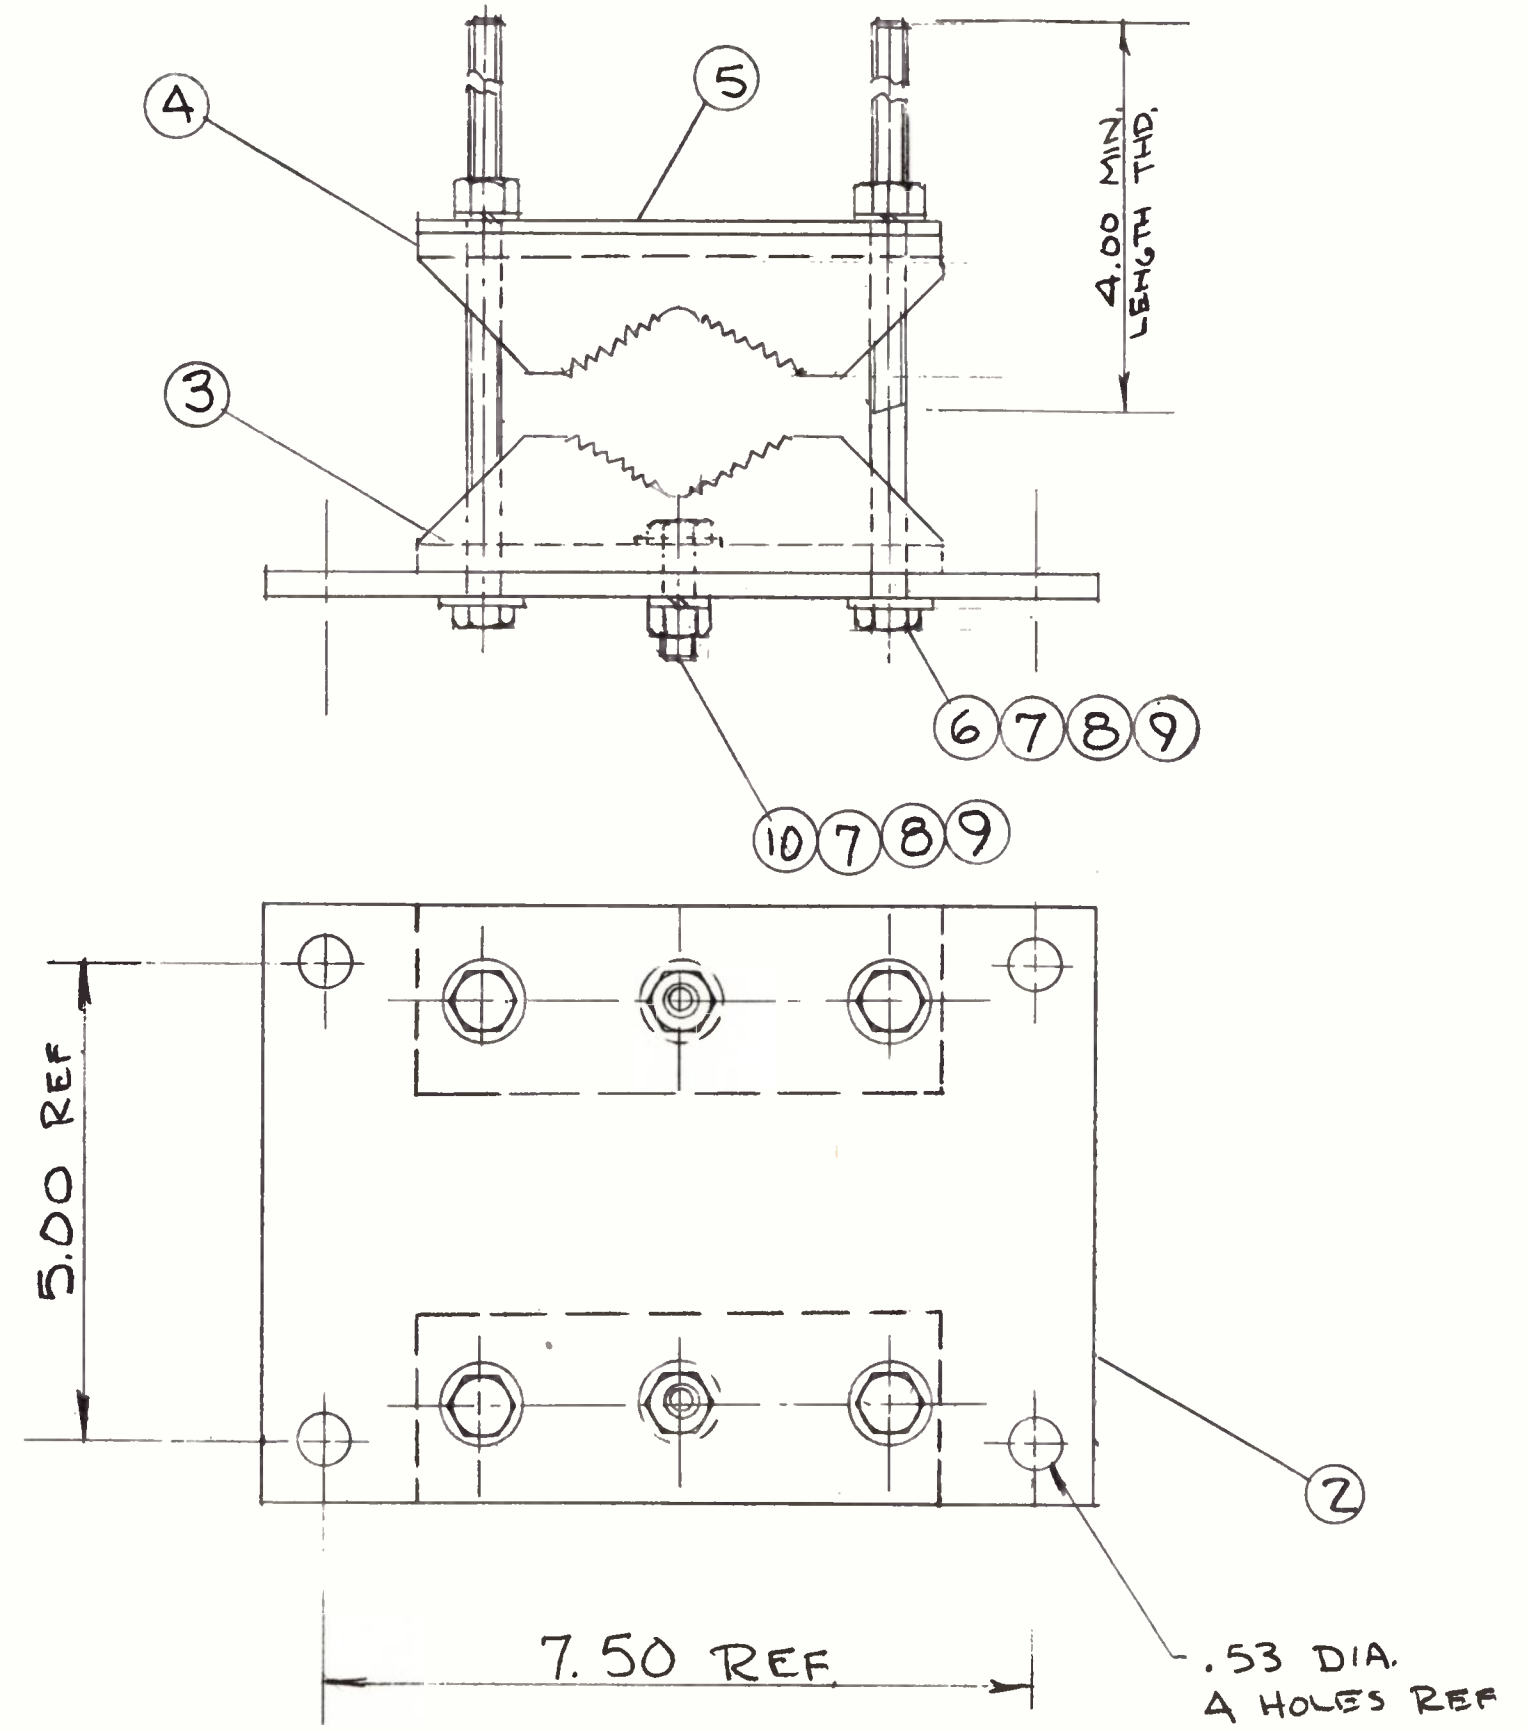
Transformer Mounting Bracket for 2 to 3 3/4 in. Diameter Leg
